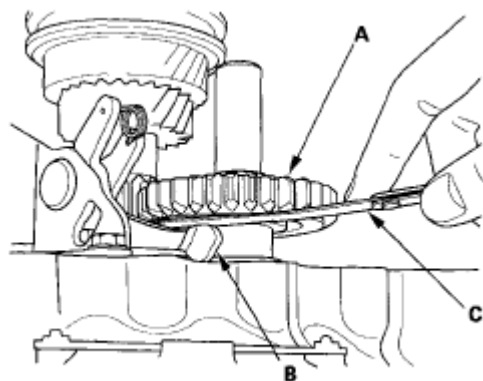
Measuring Clearance Between Reverse Idler Gear And Reverse Shift Fork
